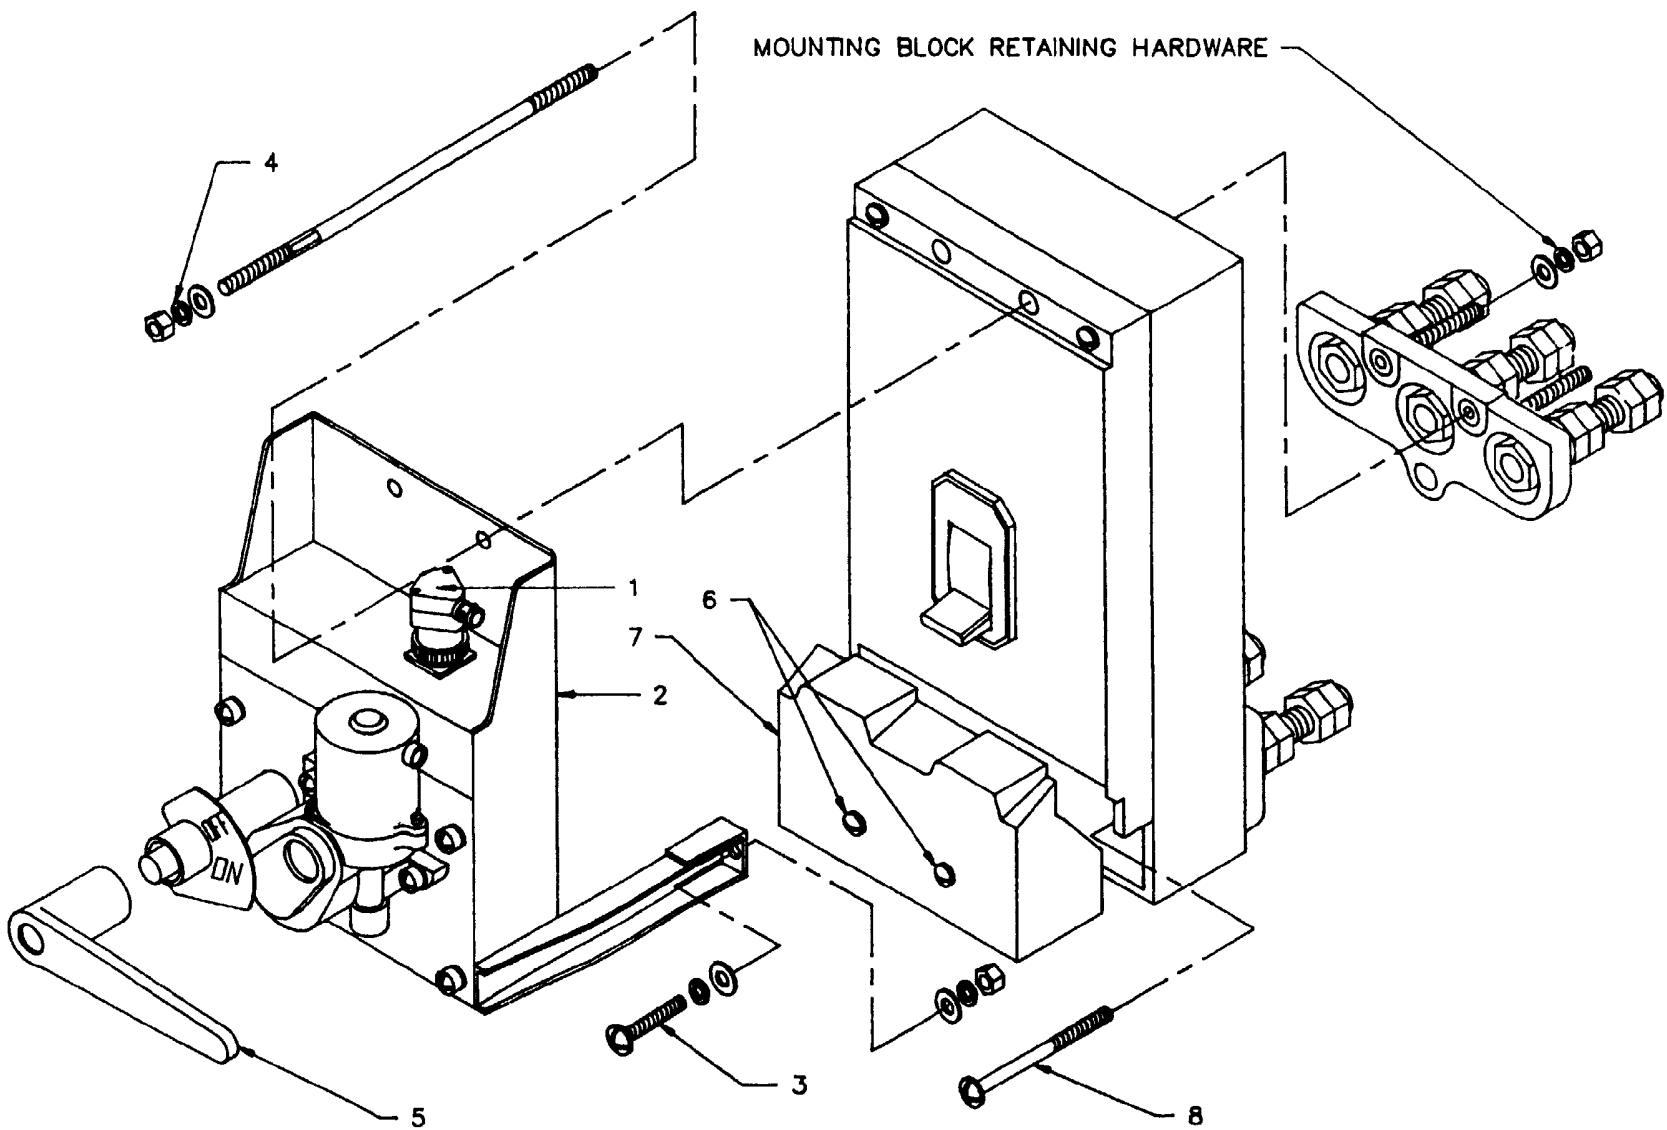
AQB-LF400 Molded Case Circuit Breaker with Motor Operator
